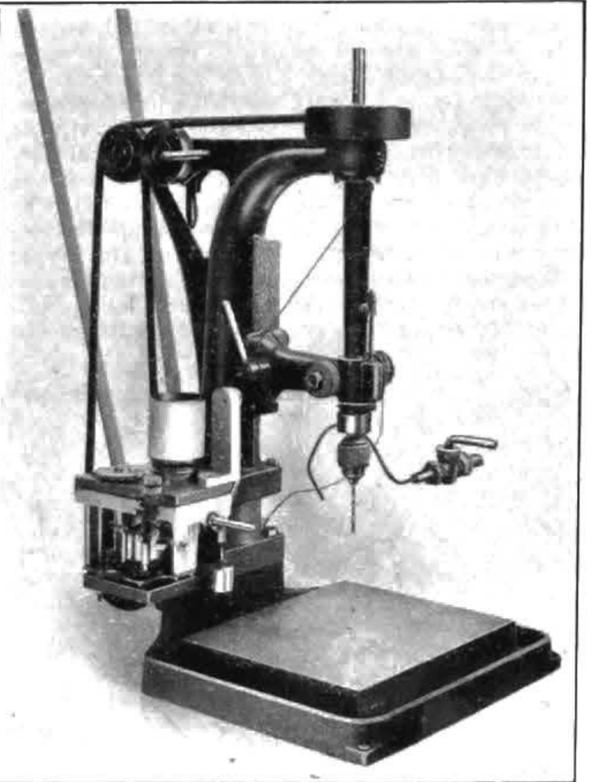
TESTING MACHINE FOR SMALL DRILLS
